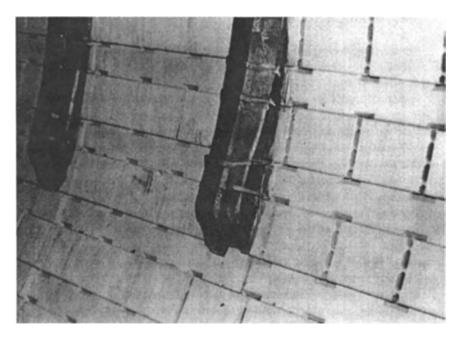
[S04] Close-up view of the gas deflectors showing damage during the removal of the rotor (see Fig. 4-8).
